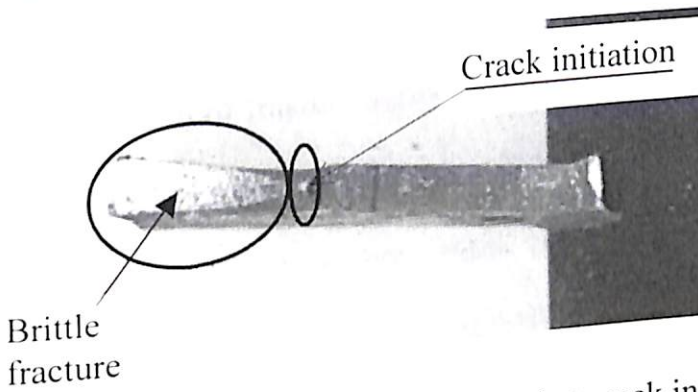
General features of fracture surfaces produced at crack initiation in EDD335.
